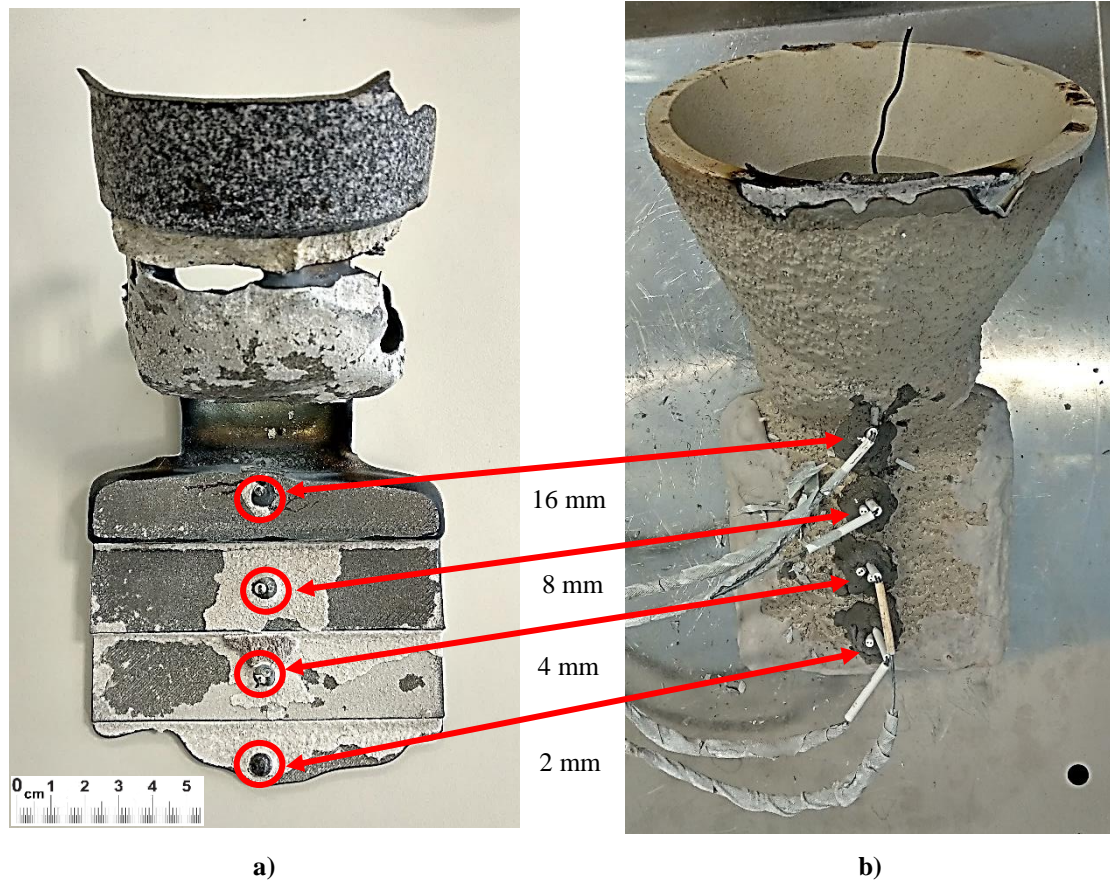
Casting components; a) Modified TNM alloy, casting part and b) Alumina stepped mould
